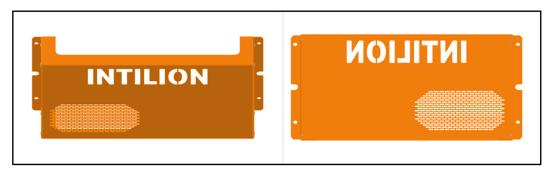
Cover panel for BMS, inverter(s), and assembly space
